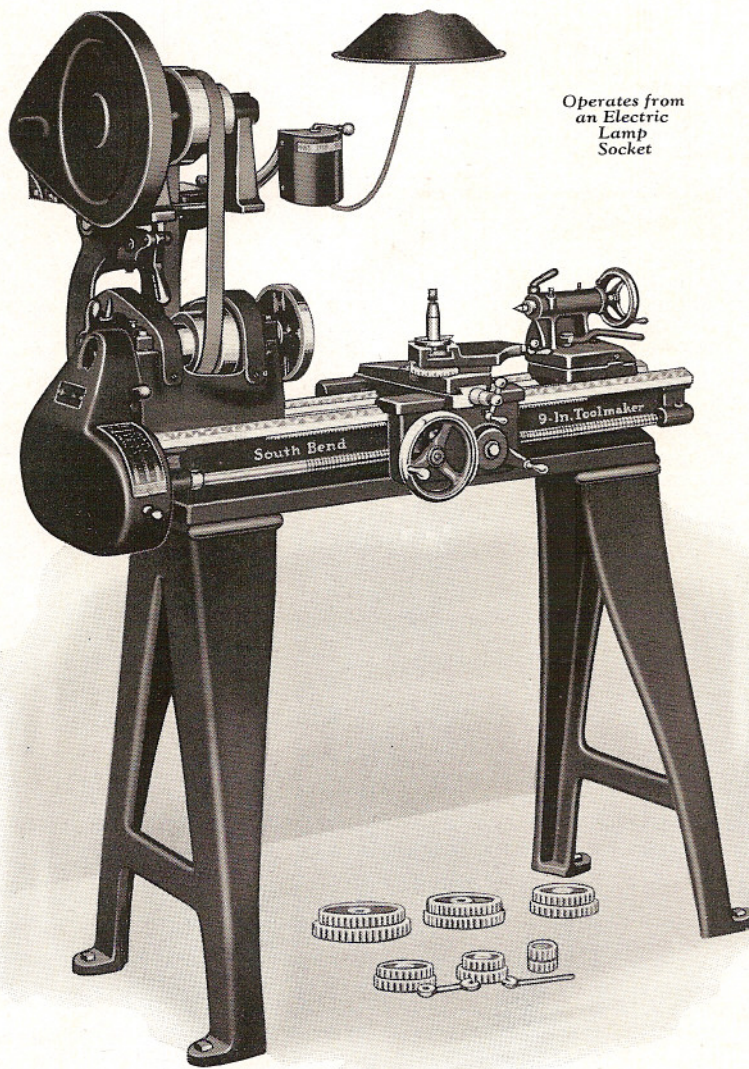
Improved Adjustable Belt Tension Countershaft for Horizontal Motor Driven Lathes.
